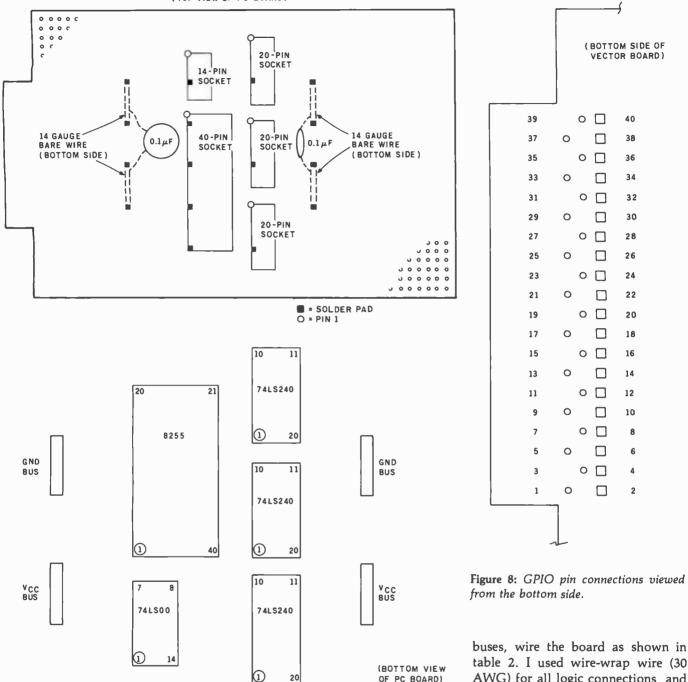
GPIO board component mounting. Five IC sockets and two sets of buses constitute the major mechanical construction of the board.
